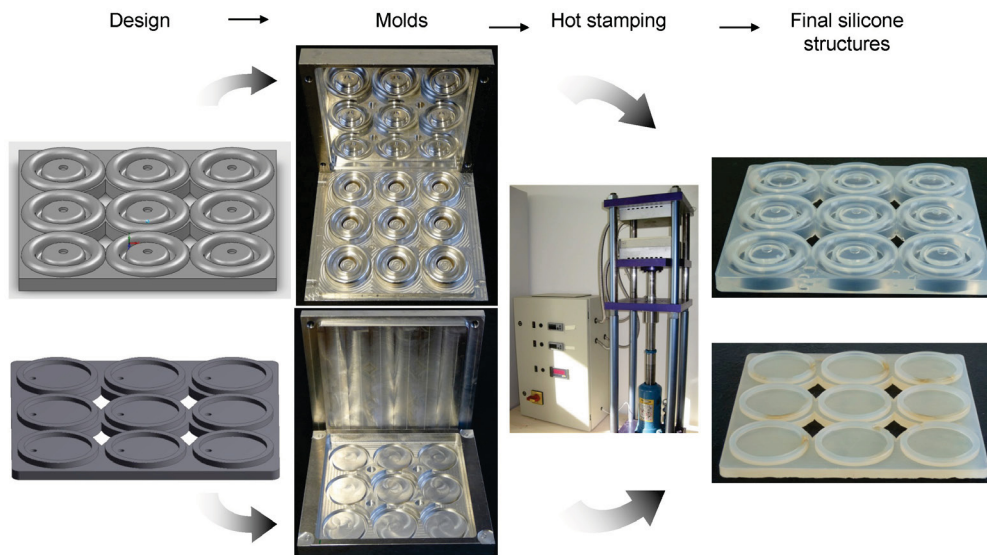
Manufacturing of the silicone layers exemplified for the hot stamping molding technique
